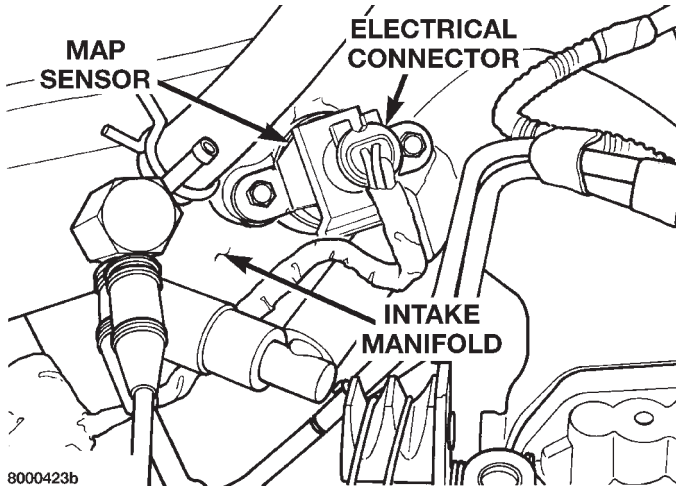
Vacuum and Electrical Connections to Intake Manifold
